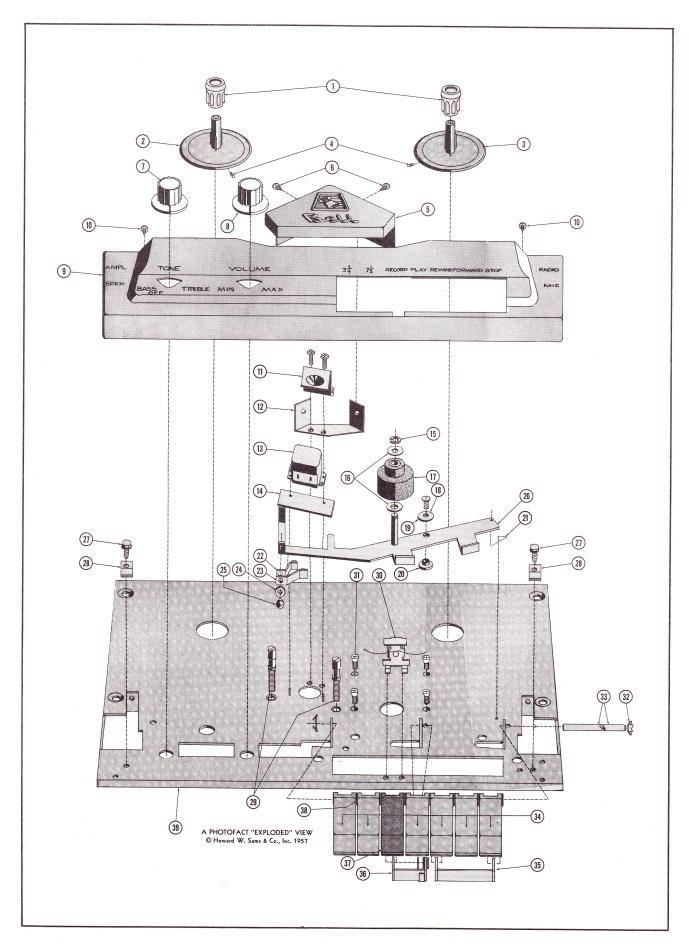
A. EXPLODED VIEW OF PARTS ABOVE BASEPLATE.
